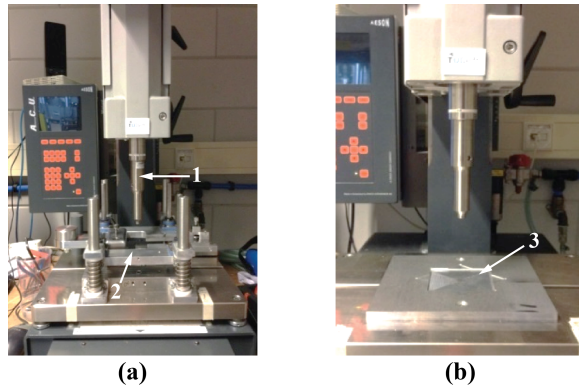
Ultrasonic welder and welding jigs used in this study. 1: circular sonotrode with a diameter of 10 mm, 2: welding jig for DLS specimens, 3: welding jig for PT specimens.
